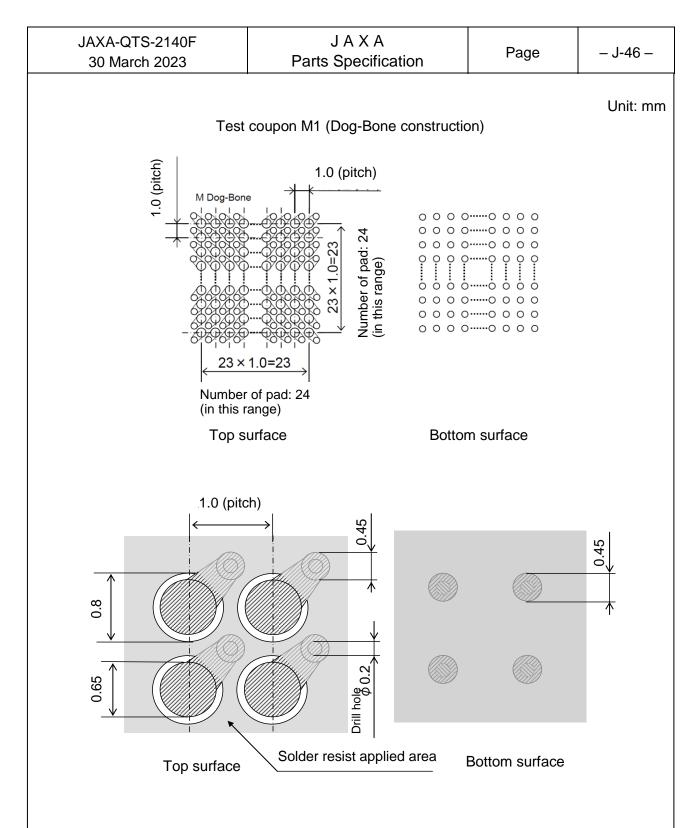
Test Coupon (Example of BGA pads) (7/12)
